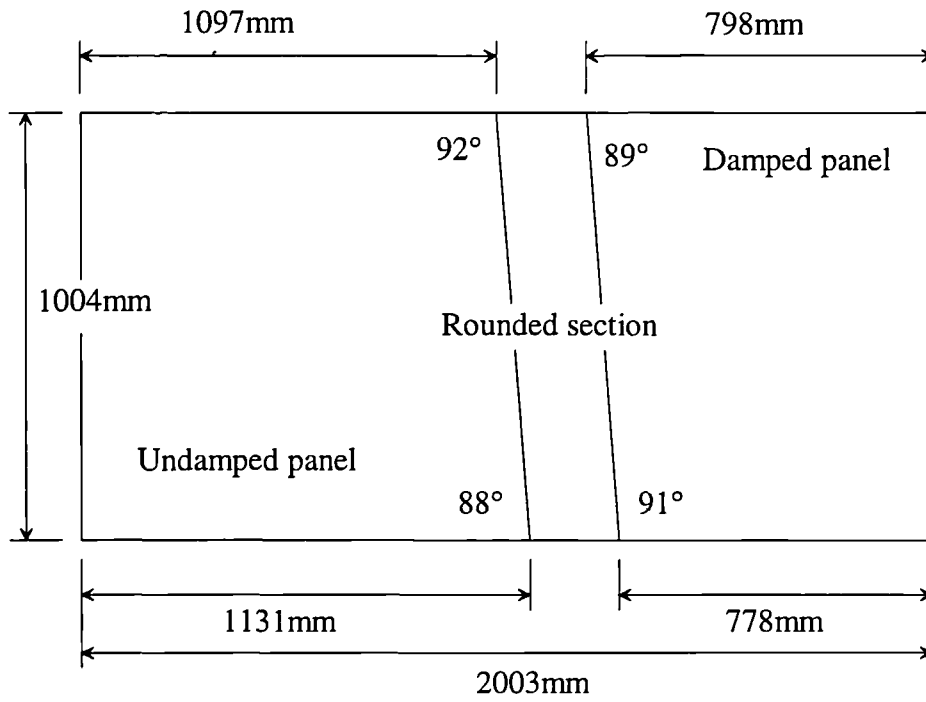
2mm panel, 63mm radius joint with 87° bend.
